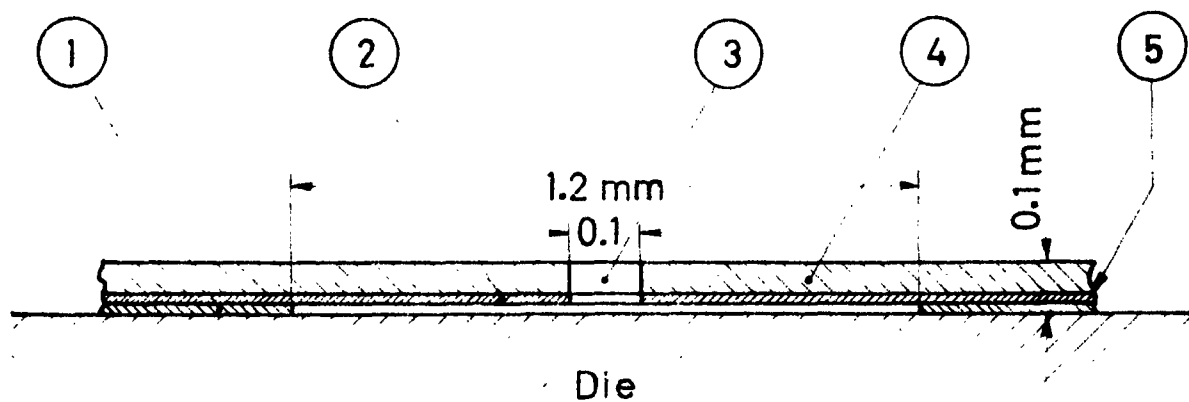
Vacuum compacted sand die with exchangeable epoxy shell
